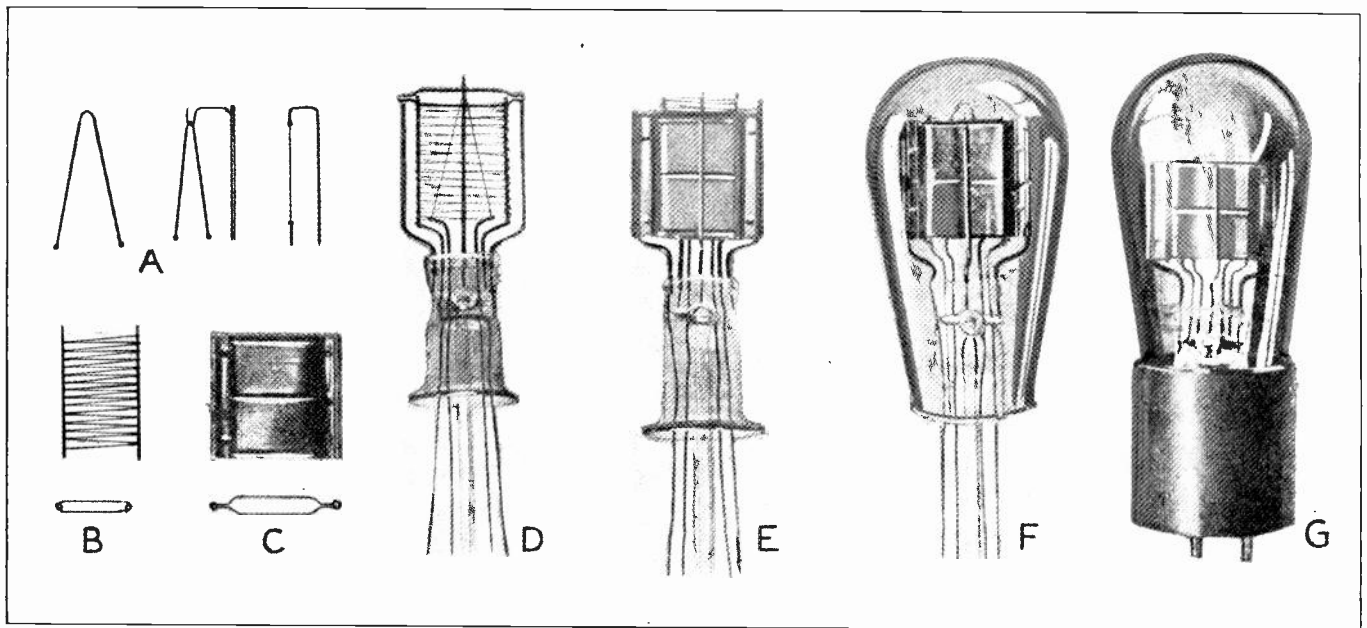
The above views show the various parts of a vacuum tube and illustrate the manner in which these parts are assembled and mounted in the complete tube. Refer to these views frequently while reading the accompanying paragraphs.
